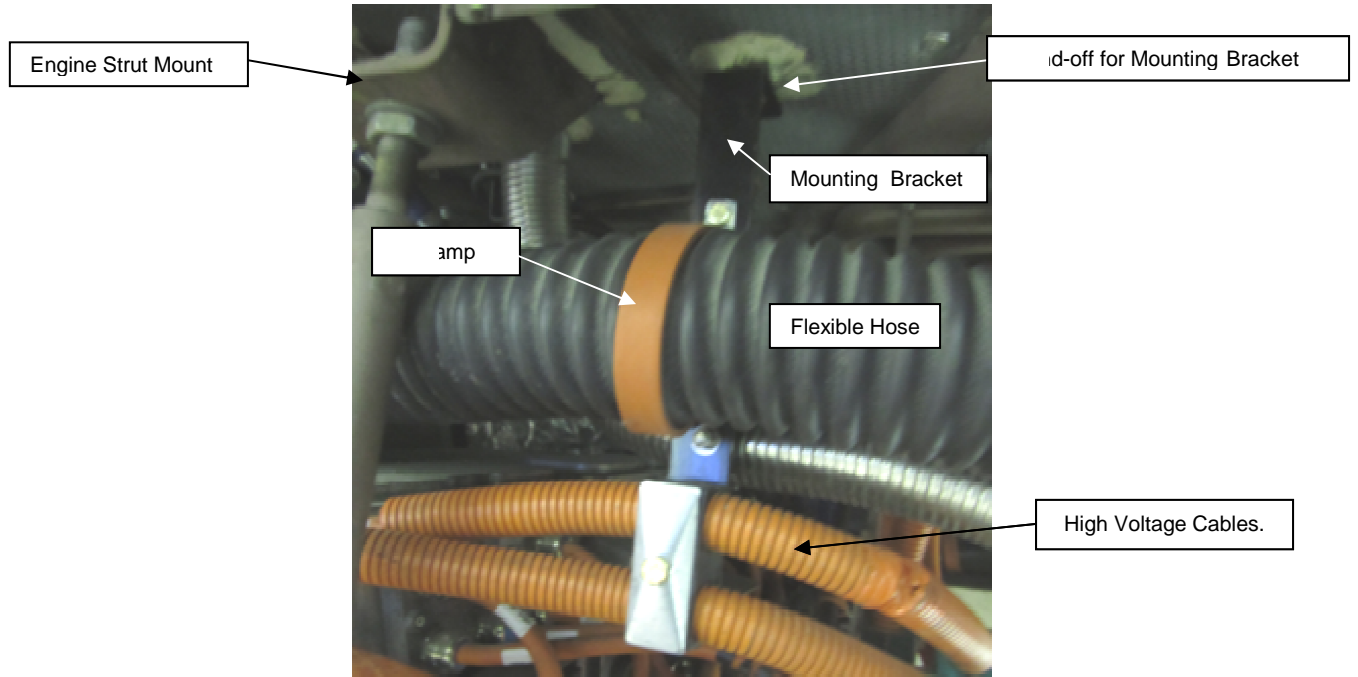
Flexible Hose Attached to Air Cleaner Assembly
